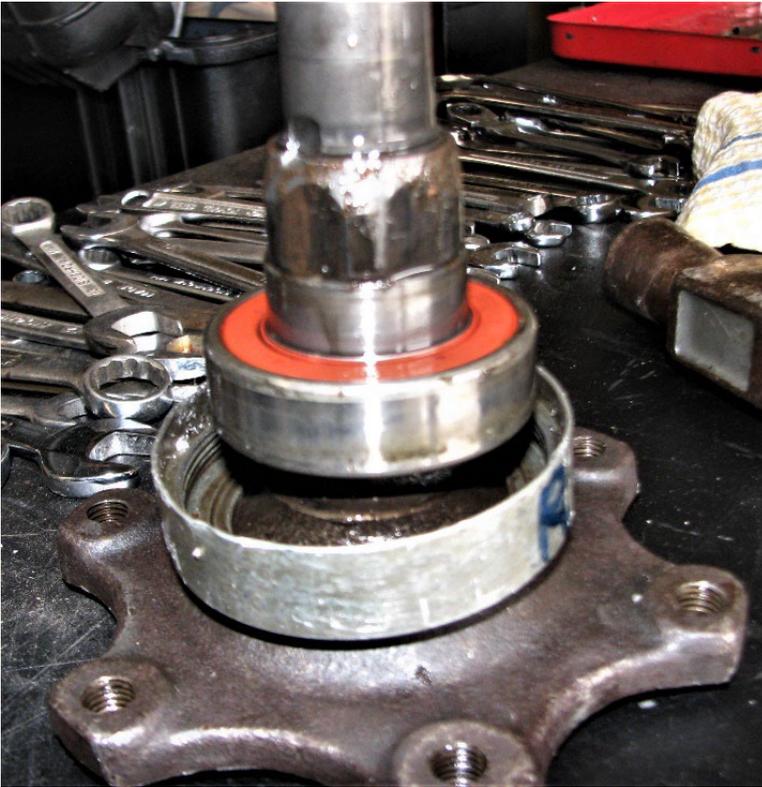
above: A closer view of the output hub shaft assembly showing the output hub, the hub shaft, the shaft lock nut, the spacer, the bearing, the ring nut and the output shaft drive flange. Should the ring nut need to be replaced, the lock nut and steel spacer will need to be removed from the shaft, then the bearing extracted from the shaft with a bearing puller, after which the ring nut may be removed from the shaft.
